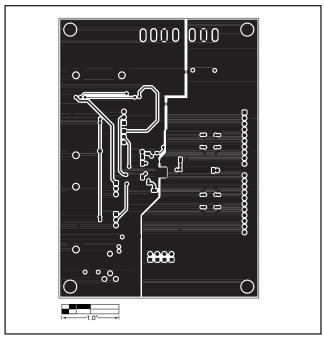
MAX1181 EV Kit PC Layout—Solder Side
